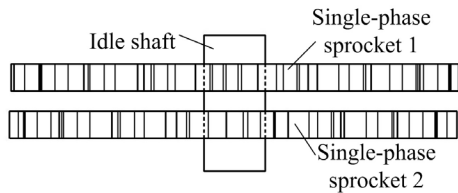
Assembly diagram of sprocket tension group and idle sprocket groups
